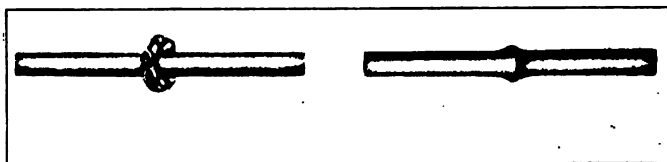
BUTT WELD. RIGHT, FLASH WELD; LEFT, UPSET WELD.
